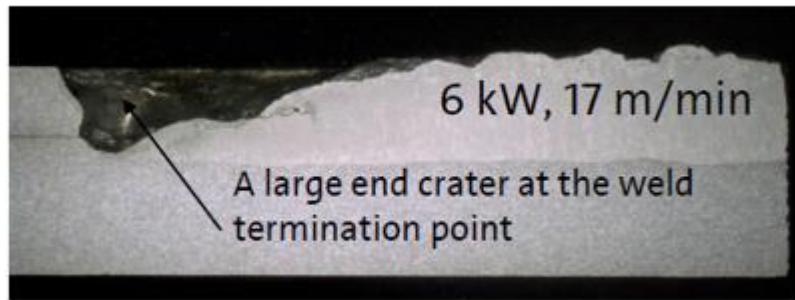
Crater formation at the end of laser keyhole welding
